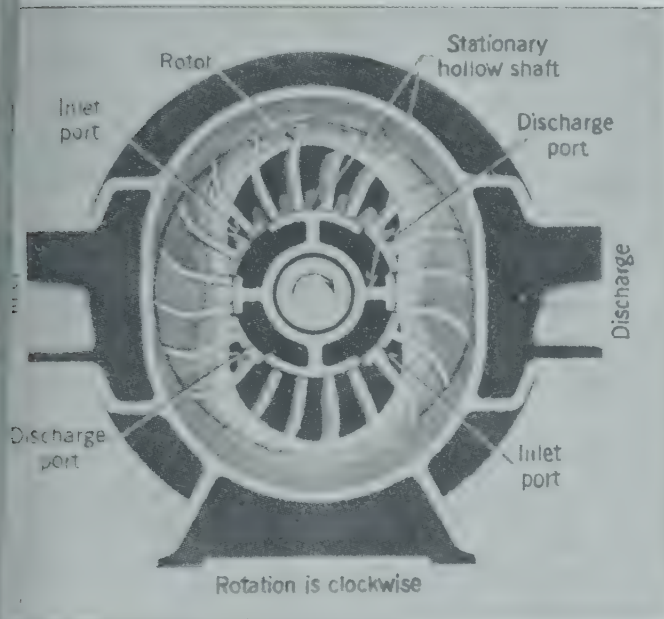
Sectional view of Hytor vacuum pump indicating operation. (Nash Engineering Co.)
